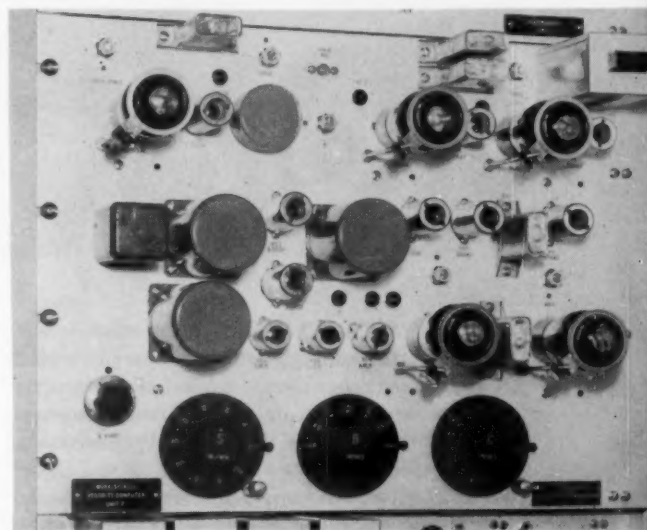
Production tool that computes from six input variables to maintain a constant chip removal rate in milling turbine blades.
